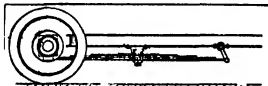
A special rear spring suspension productive of extremely easy riding owing to the great length of spring.
